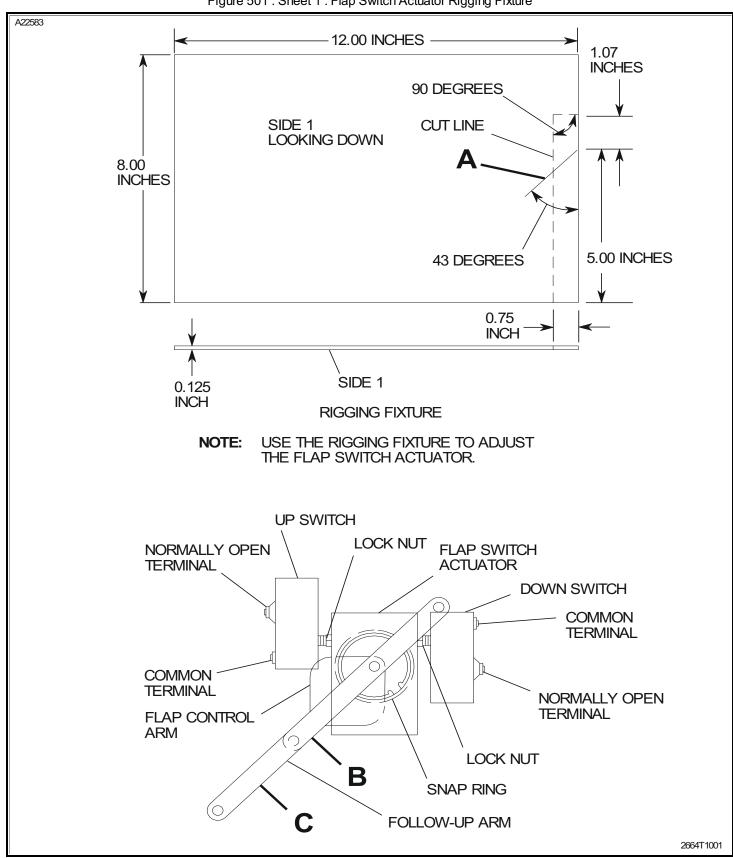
Sheet 1: Flap Switch Actuator Rigging Fixture
